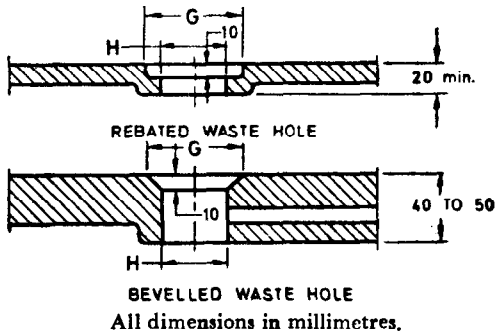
DETAILS OF WASTE HOLES FOR KITCHEN AND LABORATORY SINKS
